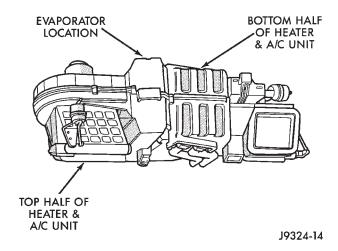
Evaporator in Heater-A/C Housing (Upside Down)
